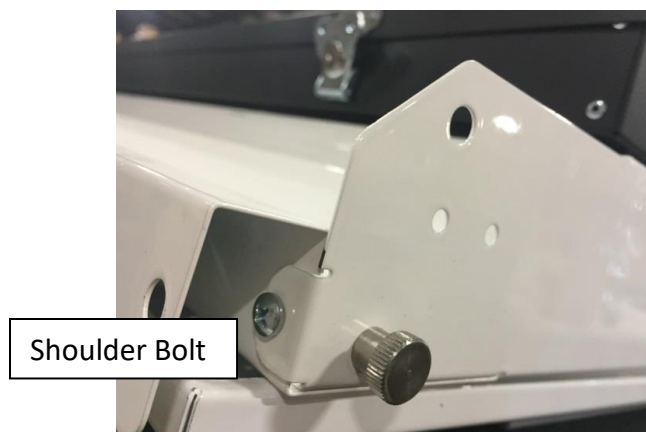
Installing the Shoulder Bolt into the Slider Joint
